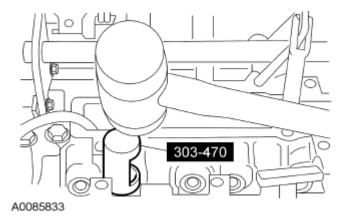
Installing Valve Seal Courtesy of FORD MOTOR CO.
